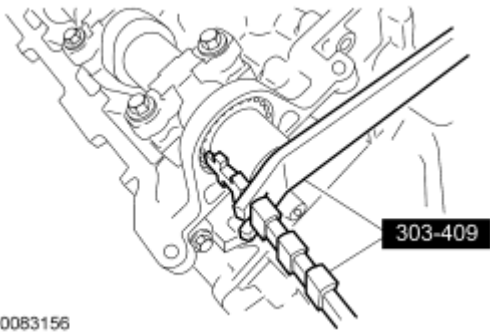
Removing Camshaft Oil Seal Using Oil Seal Remover
